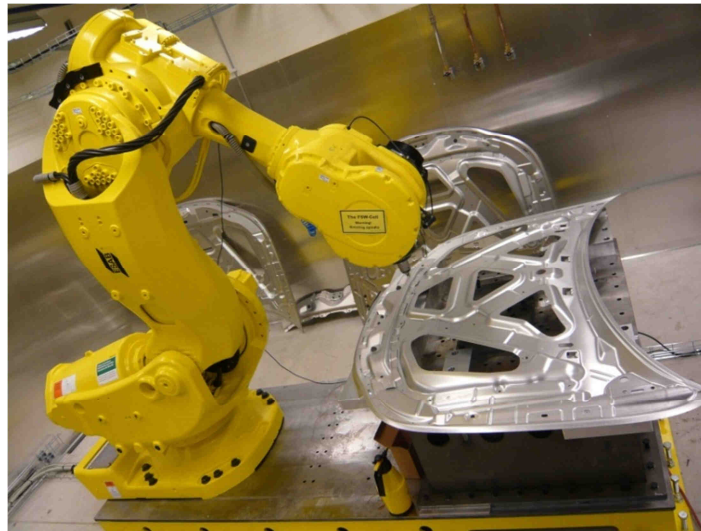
The ESAB Rosio™ FSW robot welding automotive body parts at the Production Technology Centre
